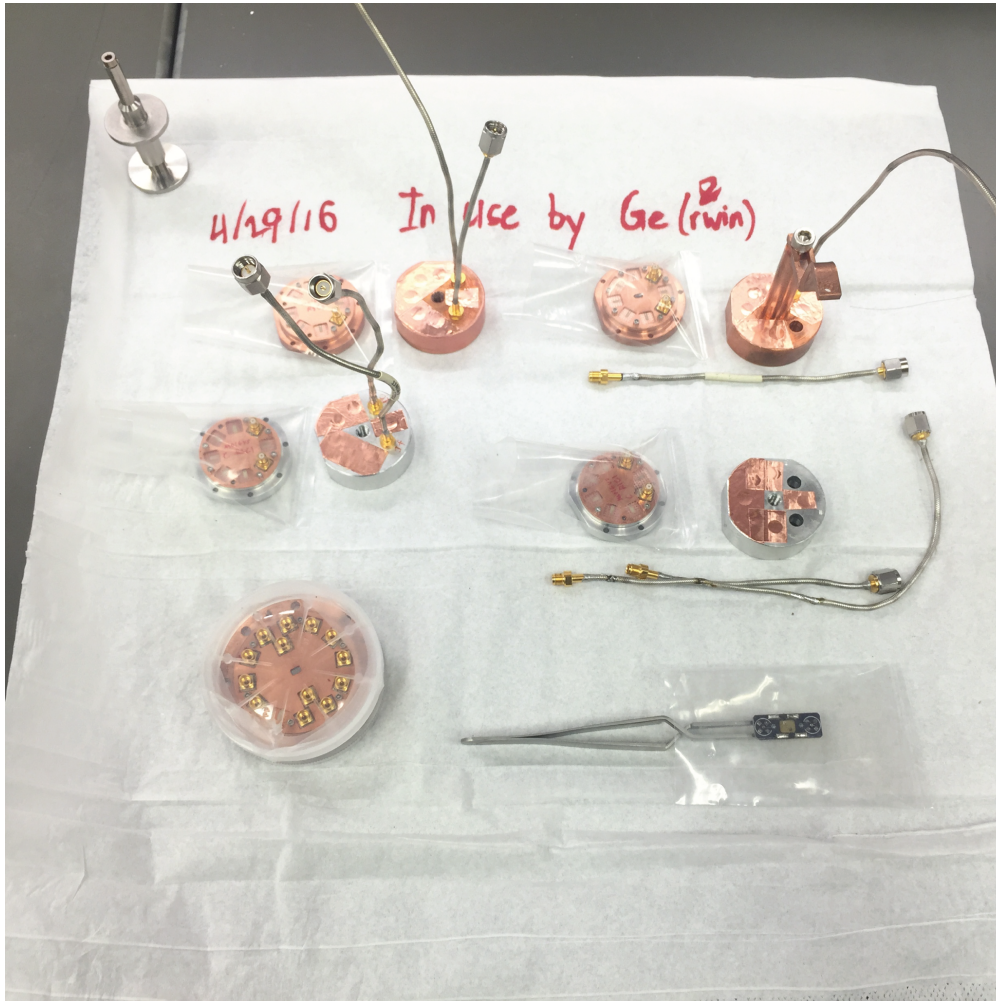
Sample Box Assemblies, Ready to Be Mounted. Smaller octo-boxes contains the fast-cool-down samples. Bigger 16-connector sample box goes into the Oxford. The filament PCB assembly is show on the bottom right, clamped between a pair of tweezers, inside a plastic bag to keep it clean.
